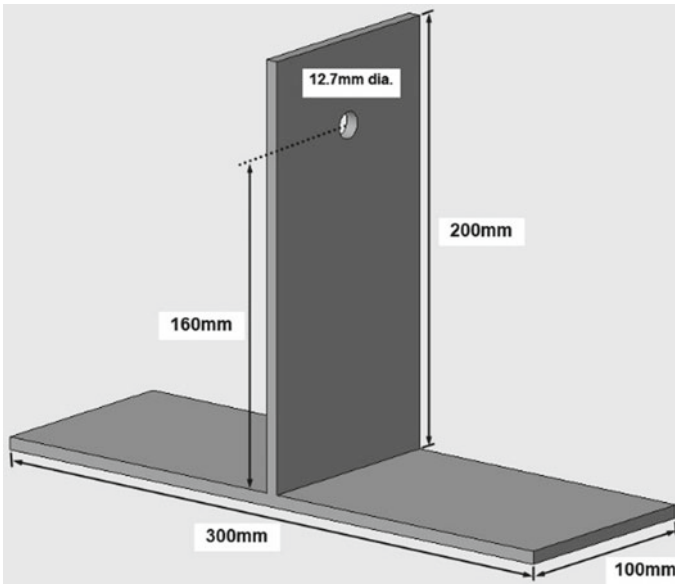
T-joint welded test sample selected for the fatigue evaluation of high-strength steel welded joints
